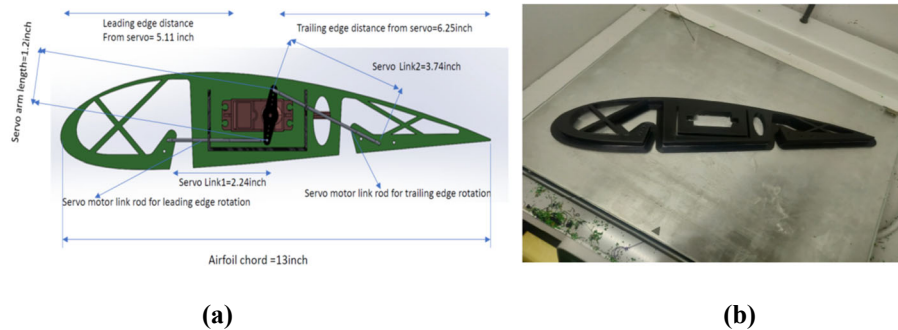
(a) CAD design of a camber morphing mechanism with detailed dimensions and (b) 3D-printed rib for the morphing mechanism where the Ultimaker 3D printer and PETG materials were used.
